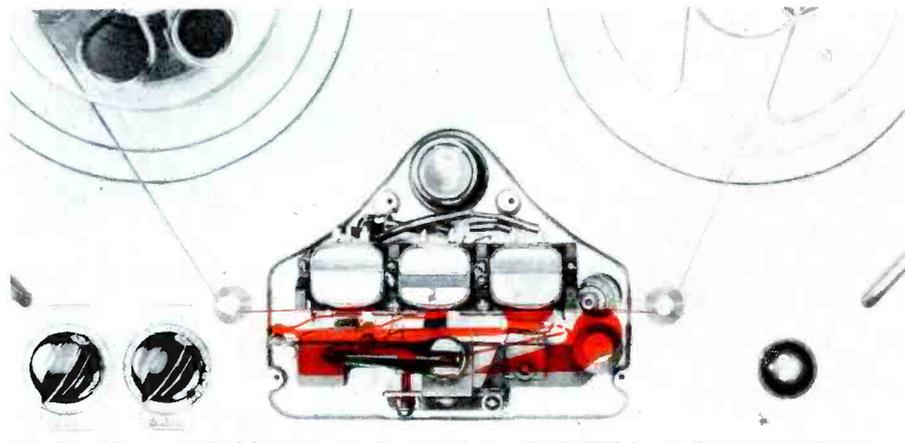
B. Parts Which Move When Tape Drive Control Is Moved to Record or Playback Position. Positions Before Moving Are Shown in Black and After Moving Are in Red.
